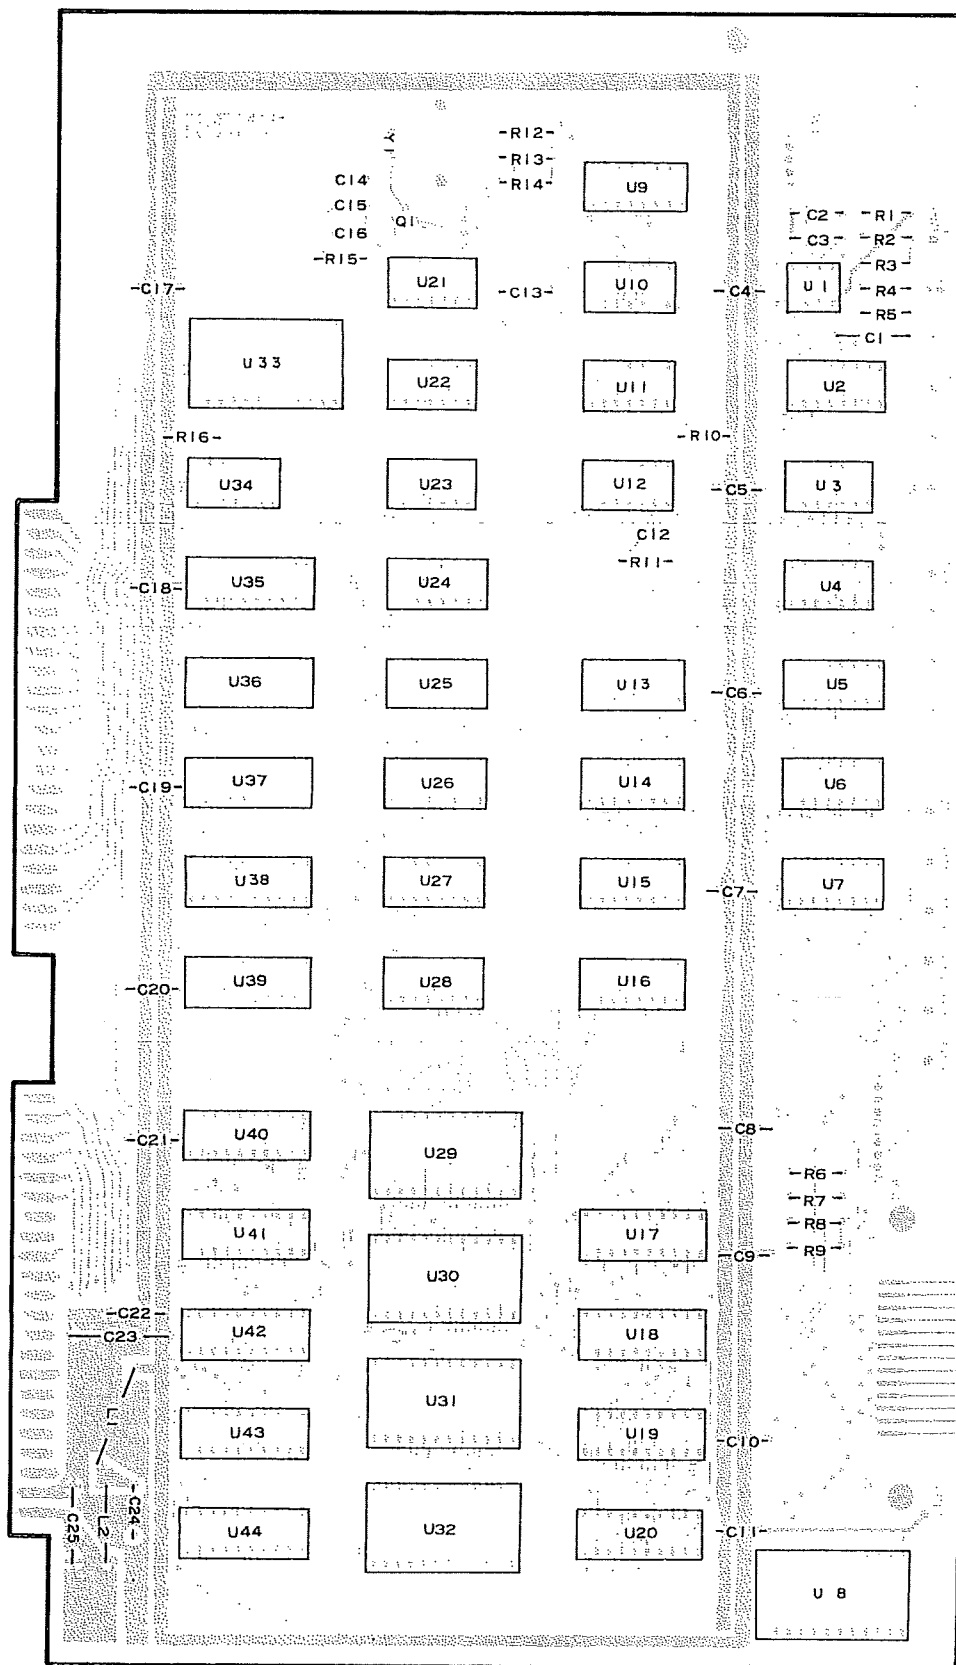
A1 Graphic Display Control Board Assembly Component Locations.
